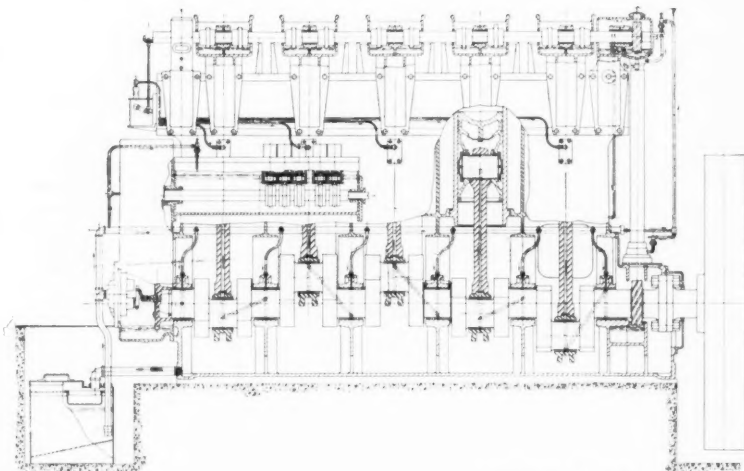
Sectional view of a Fulton Diesel engine, indicating the path followed by lubricating oil through crankshaft and connecting rods. All bearings, as well as cam shaft gears, are lubricated by a positive circulating pressure system. Oil drains from the crankcase into one of two sump tanks, where it is strained prior to recirculation.
